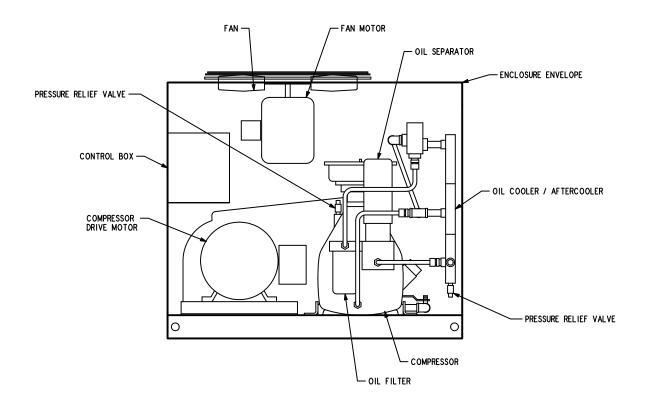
PACKAGE - COMPRESSOR / MOTOR SIDE
